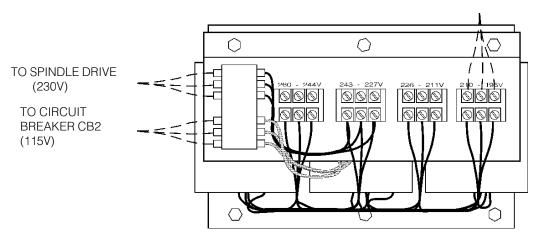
POLYPHASE BANK TRANSFORMER ASSEMBLY.
